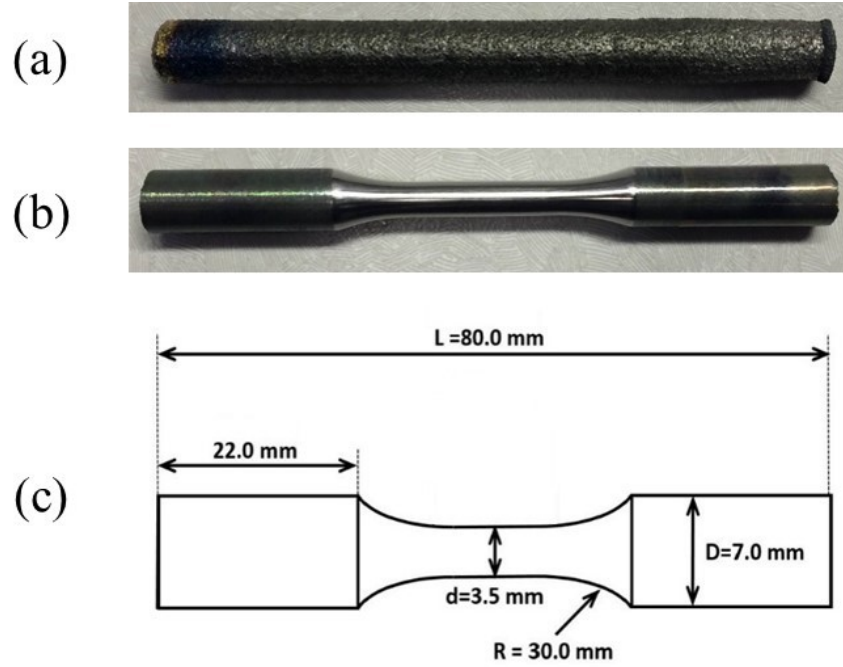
(a) As-Fabricated NiTi rod, (b) machined specimen, and (c) drawing of the fatigue specimen.
